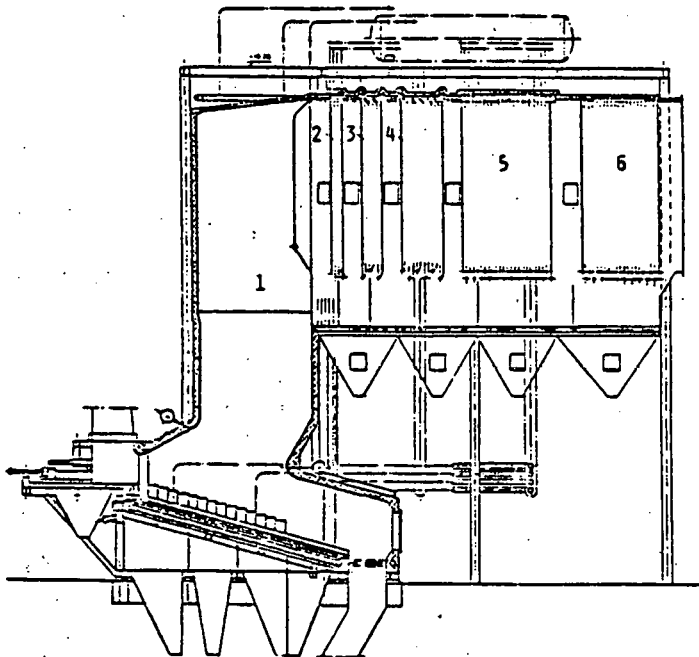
VON ROLL (TYPICAL) TAIL-END BOILER
